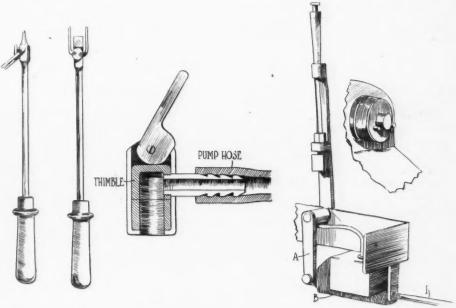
TWO-WAY VALVE TOOL. FIG. 7—THUMBLOCK HOSE COUPLING. FIG. 8—LAW-RENCE MOTOR LOCK
